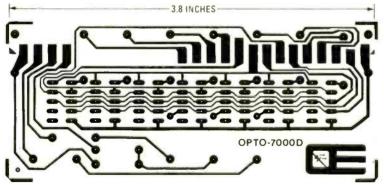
DISPLAY BOARD foil pattern. You may want to make several and adapt them for use in other digital instruments using the FND357 or similar 7-segment LED displays.
